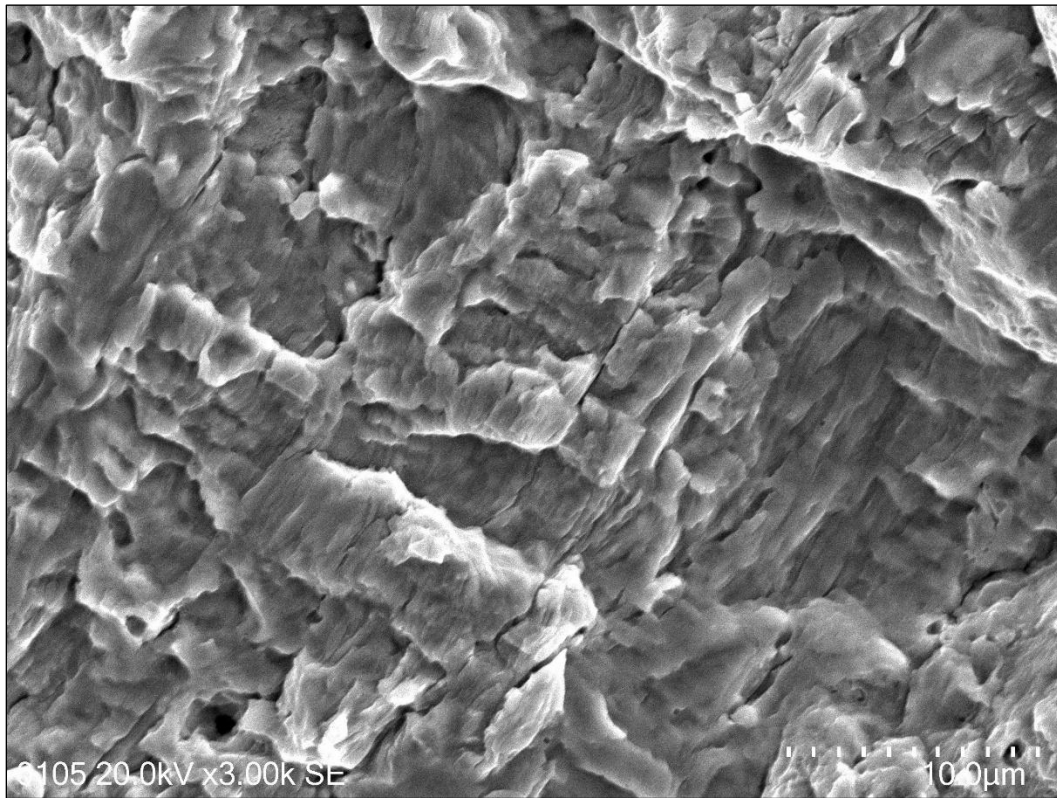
Fine fatigue striations in weld metal fatigue zone
